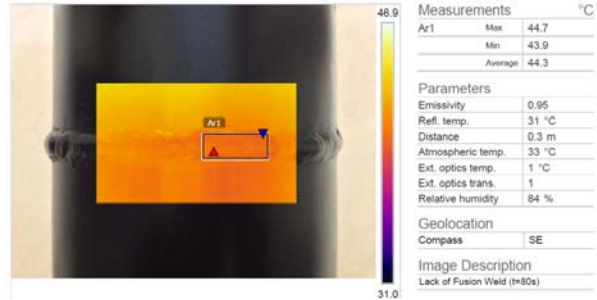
Infrared thermal image of lack of fusion weld
